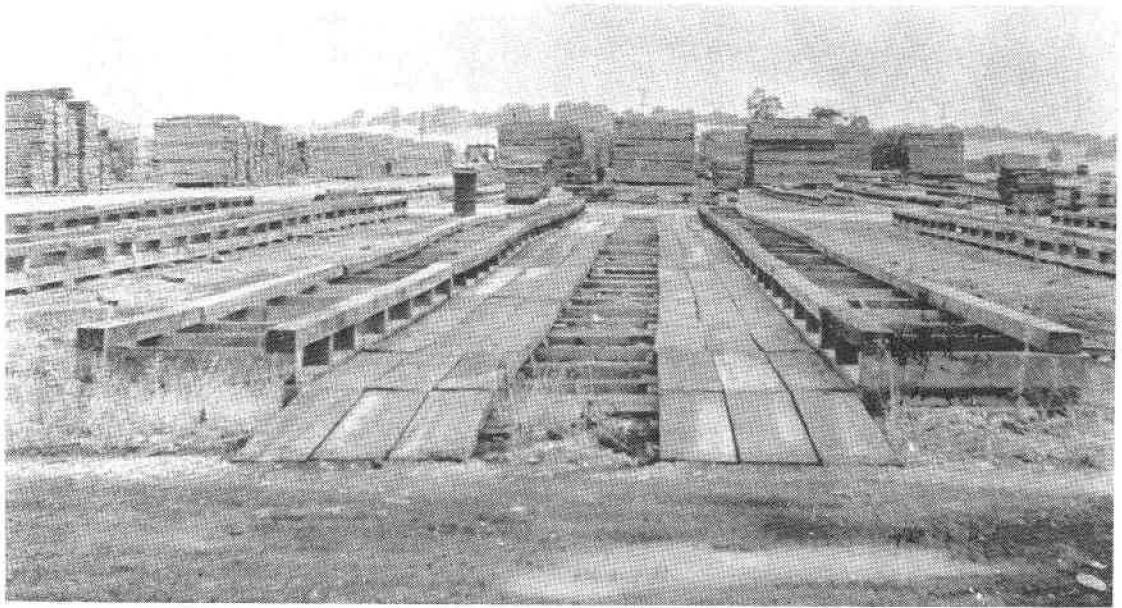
This permanent or fixed foundation for package piles has planked runways for the wheels of the fork-lift truck. The planks rest on the sleepers of the foundation.
